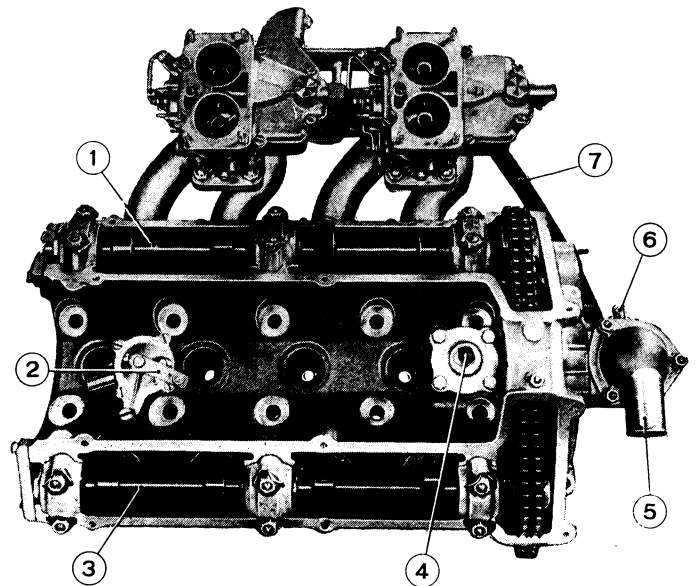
118 B.000 engine head with valve gear covers removed.
